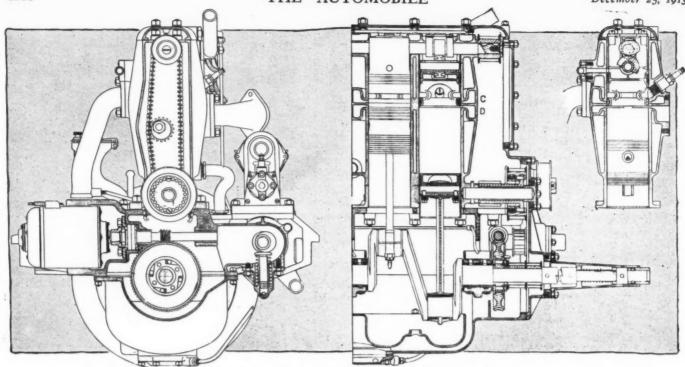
End view and partial section of the Carter piston valve motor. The valves are operated by an overhead camshaft
